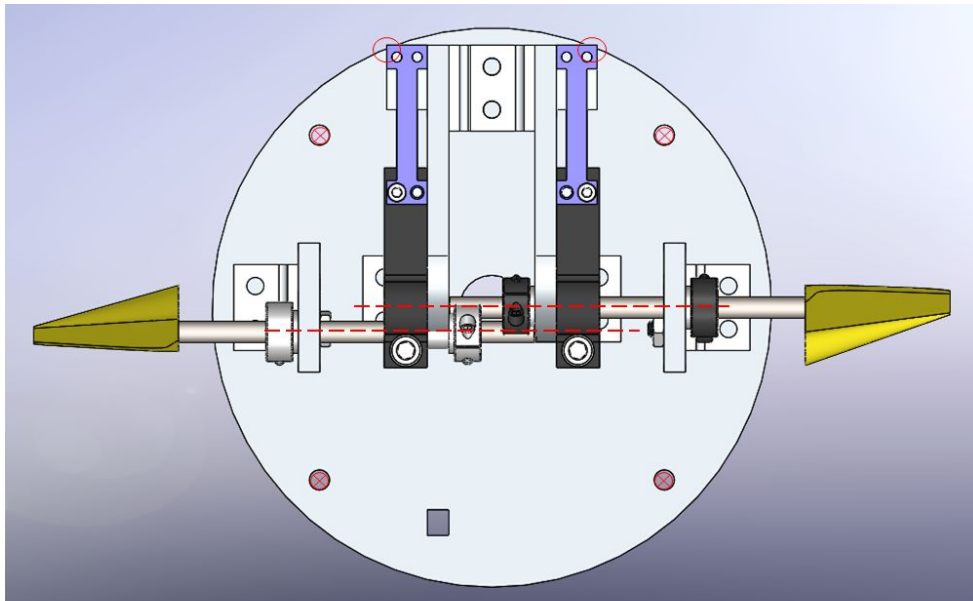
Front view of the assembly, illustrating important mechanisms and dimensions. The red border box shows one of the problems of this design. In situ adjustment is achieved by accessing the locking screw in the direction of the red arrow.
